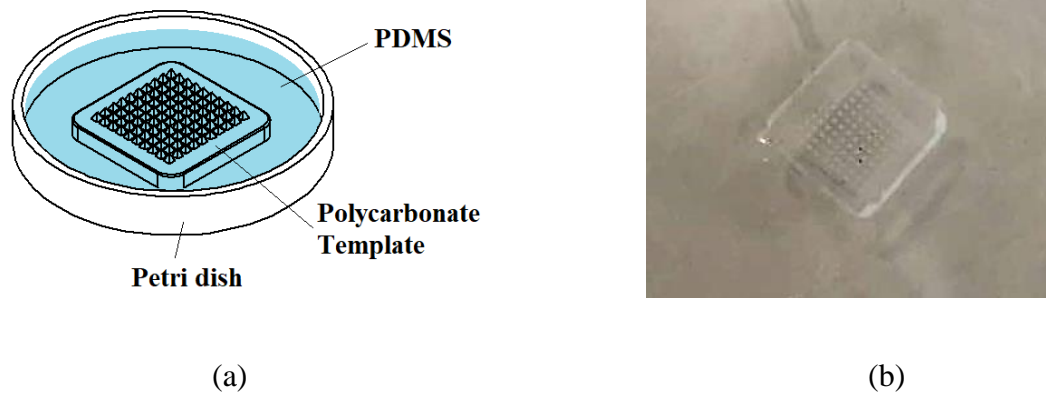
(a) Mold fabrication schematic before heat curing. (b) PDMS mold fabricated by the polycarbonate template after heat curing.
